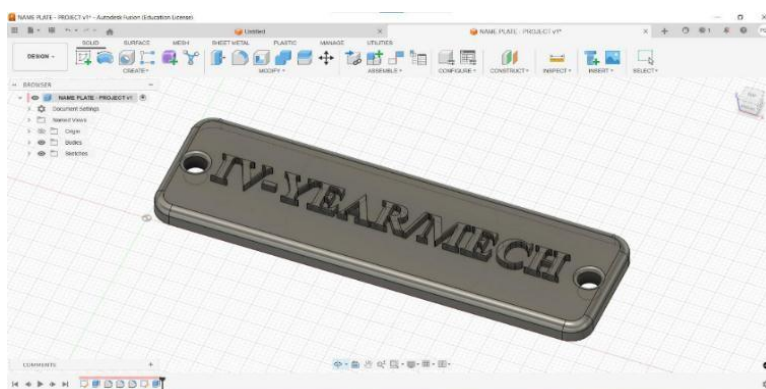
CAD model of a customized classroom Nameplate designed using Autodesk Fusion 360, featuring engraved text and mounting holes for easy installation.
